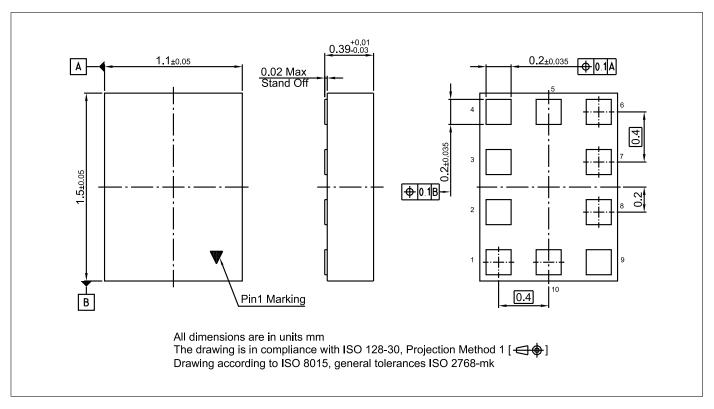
TSLP-10-3 package outline (top, side and bottom views)
